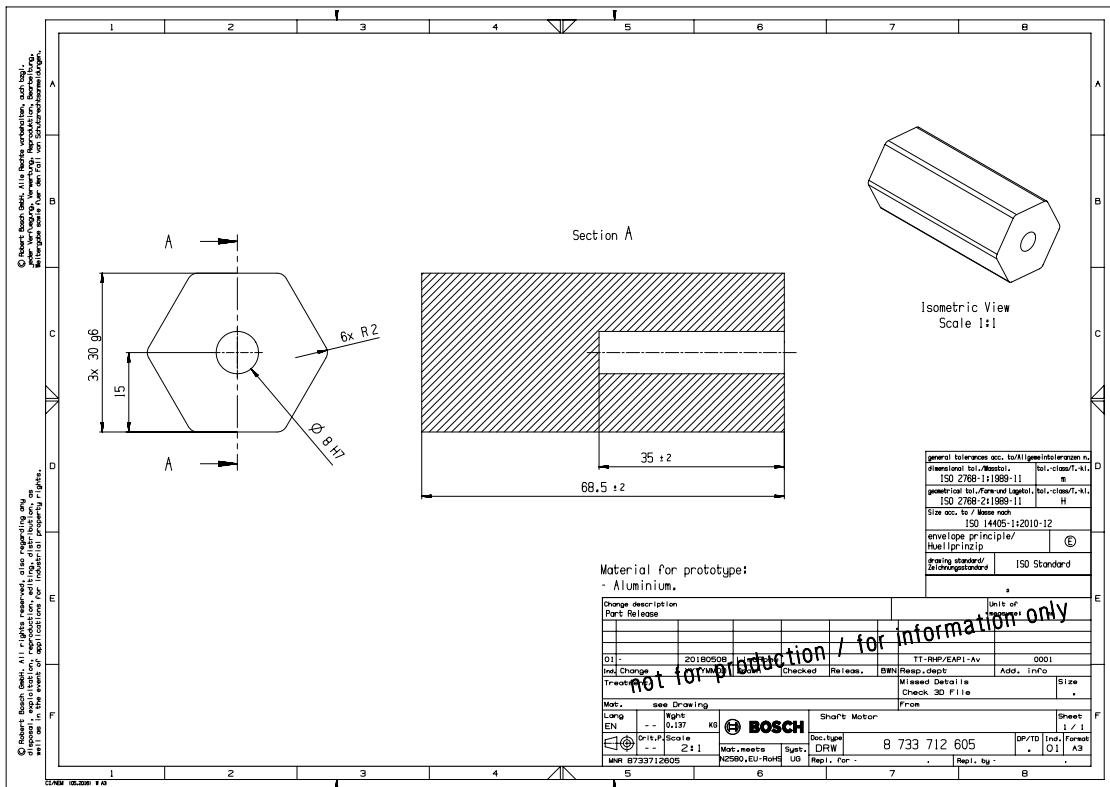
Technical Drawing Hexagonal Shaft - connection between fan and motor shaft.
